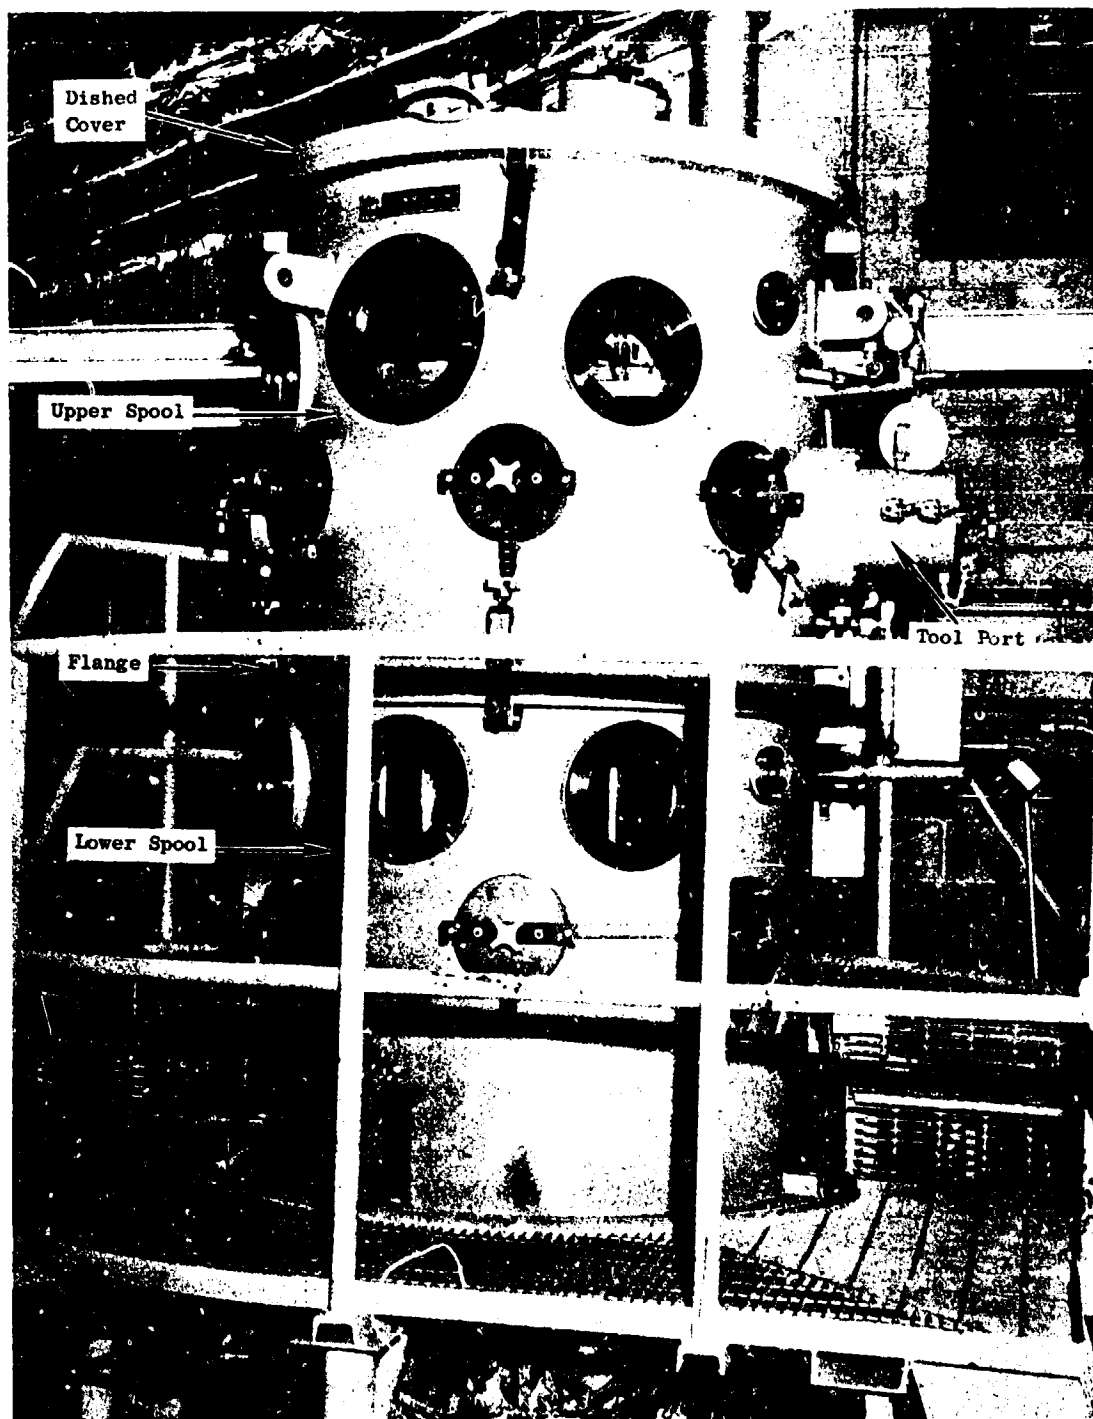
Welding Chamber Installed Around the T-111 Corrosion Loop. The Chamber Consists of Two Spools Which Can Be Rotated Independently for Improved Access to Weld Locations. (C68090424)
